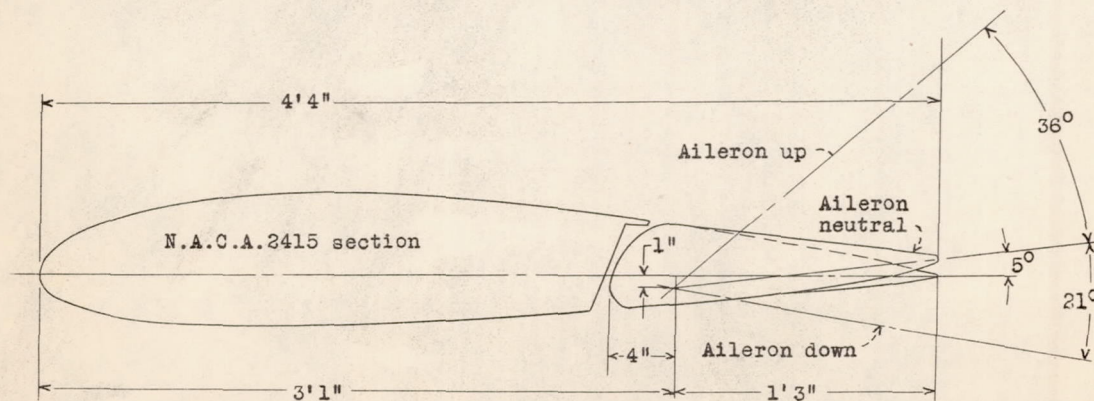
Sectional view of Fowler wing showing aileron positions.
